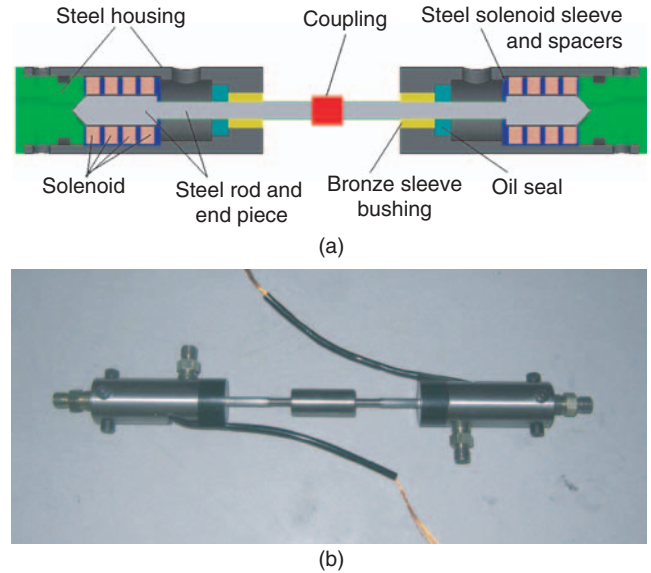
Redesigned MR fluid valve; (a) cutaway view of a solid model and (b) physical fluid valve. Coil stacks were relocated to the inner housing surface to allow significant size reduction of the movable valve piece.
